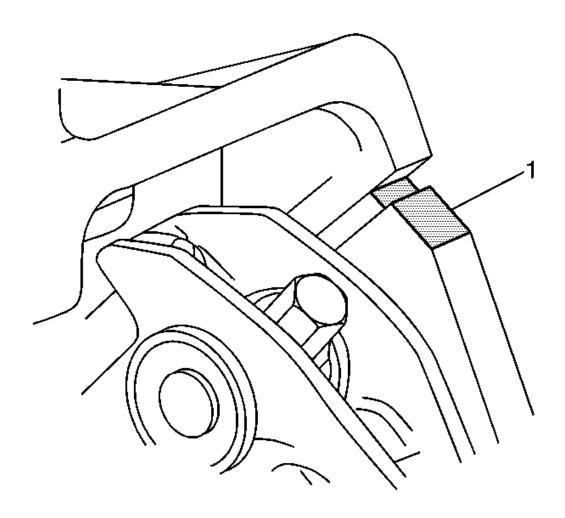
View Of Valve Rocker Arm Cover - Left Courtesy of GENERAL MOTORS CORP.
